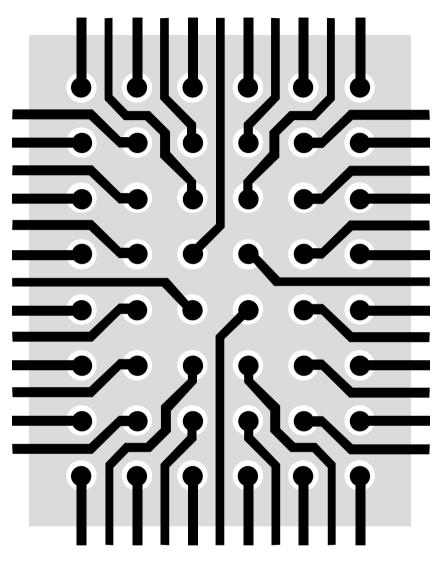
Example of 48-Ball Single Layer Board Routing
